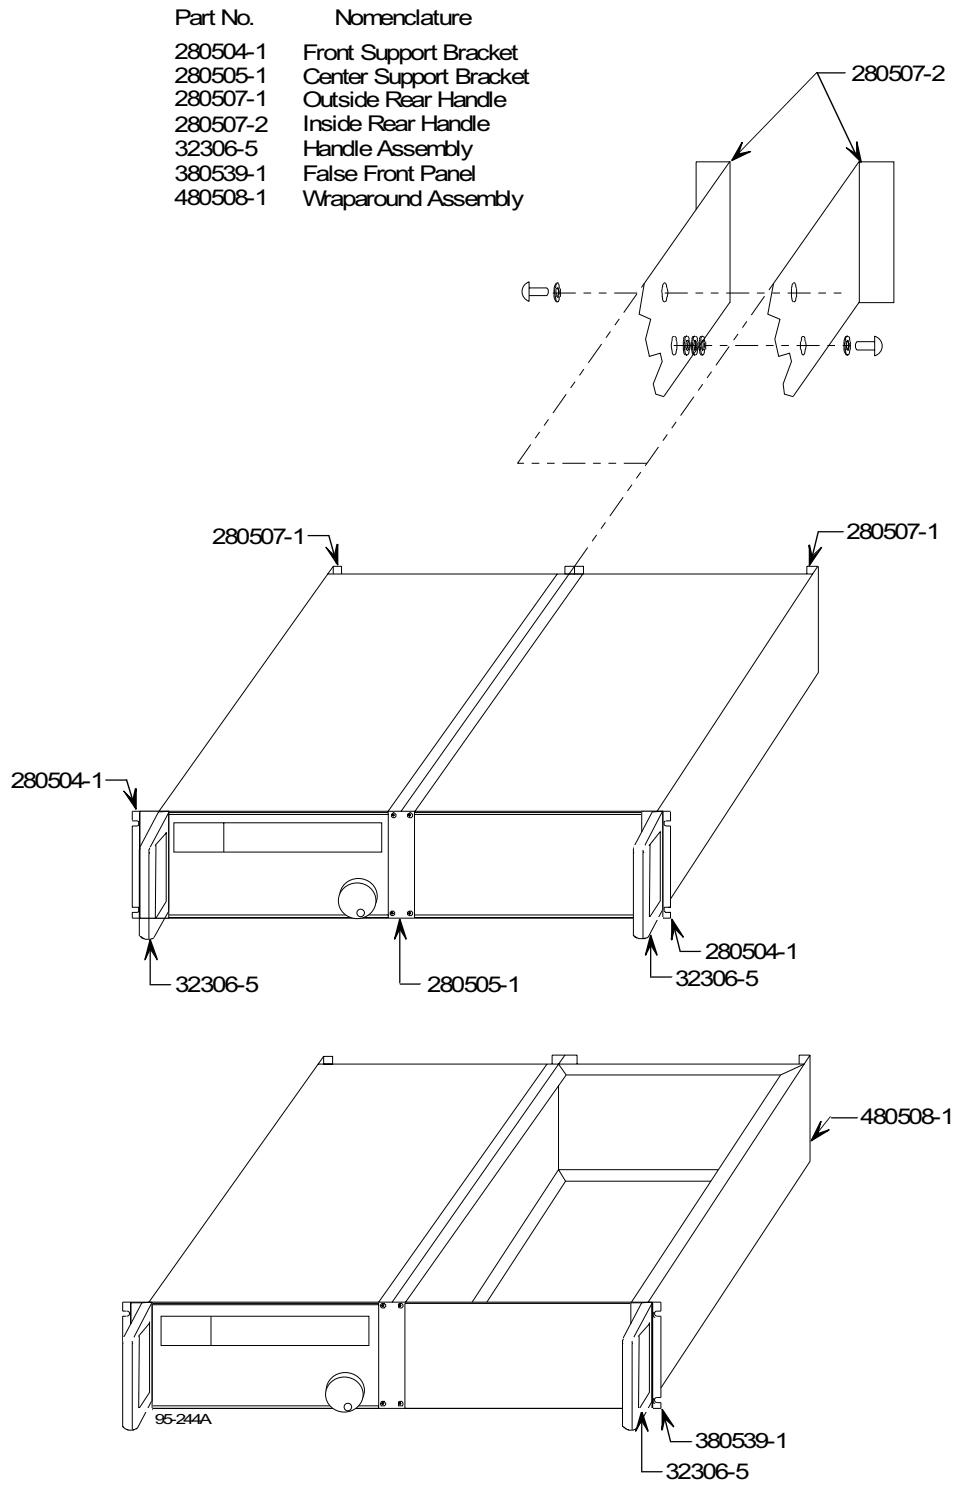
WJ-8615P, Configuration of Rack Mounting Accessories
